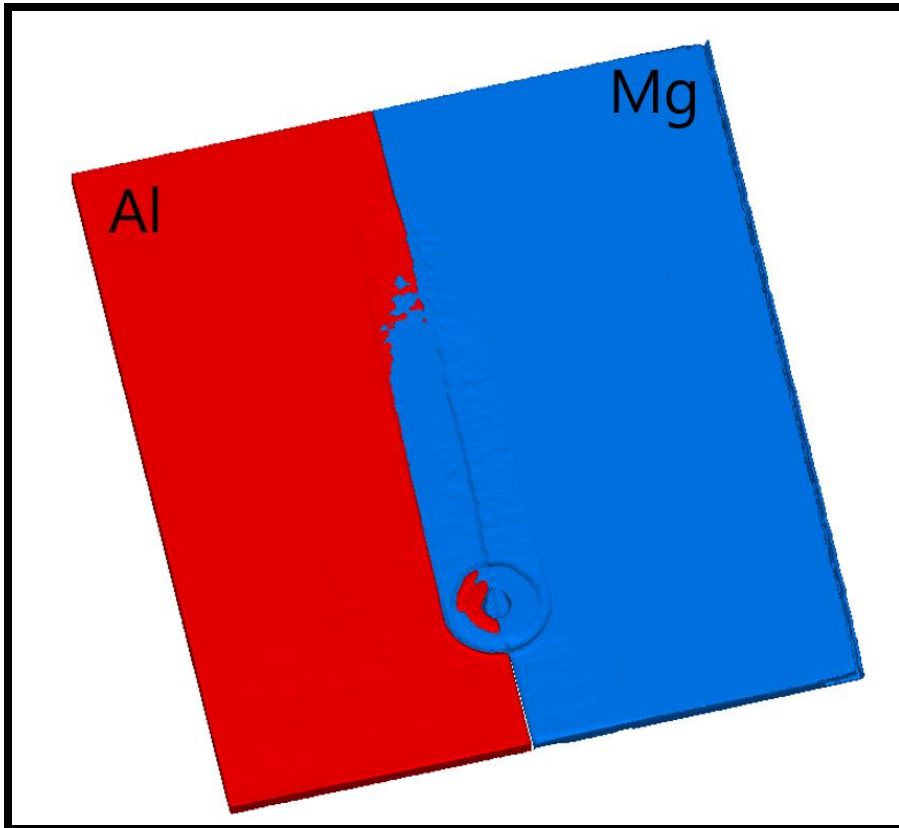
3D rendering of weld sample (f) the top surface AZ31b material deposit is evident.
